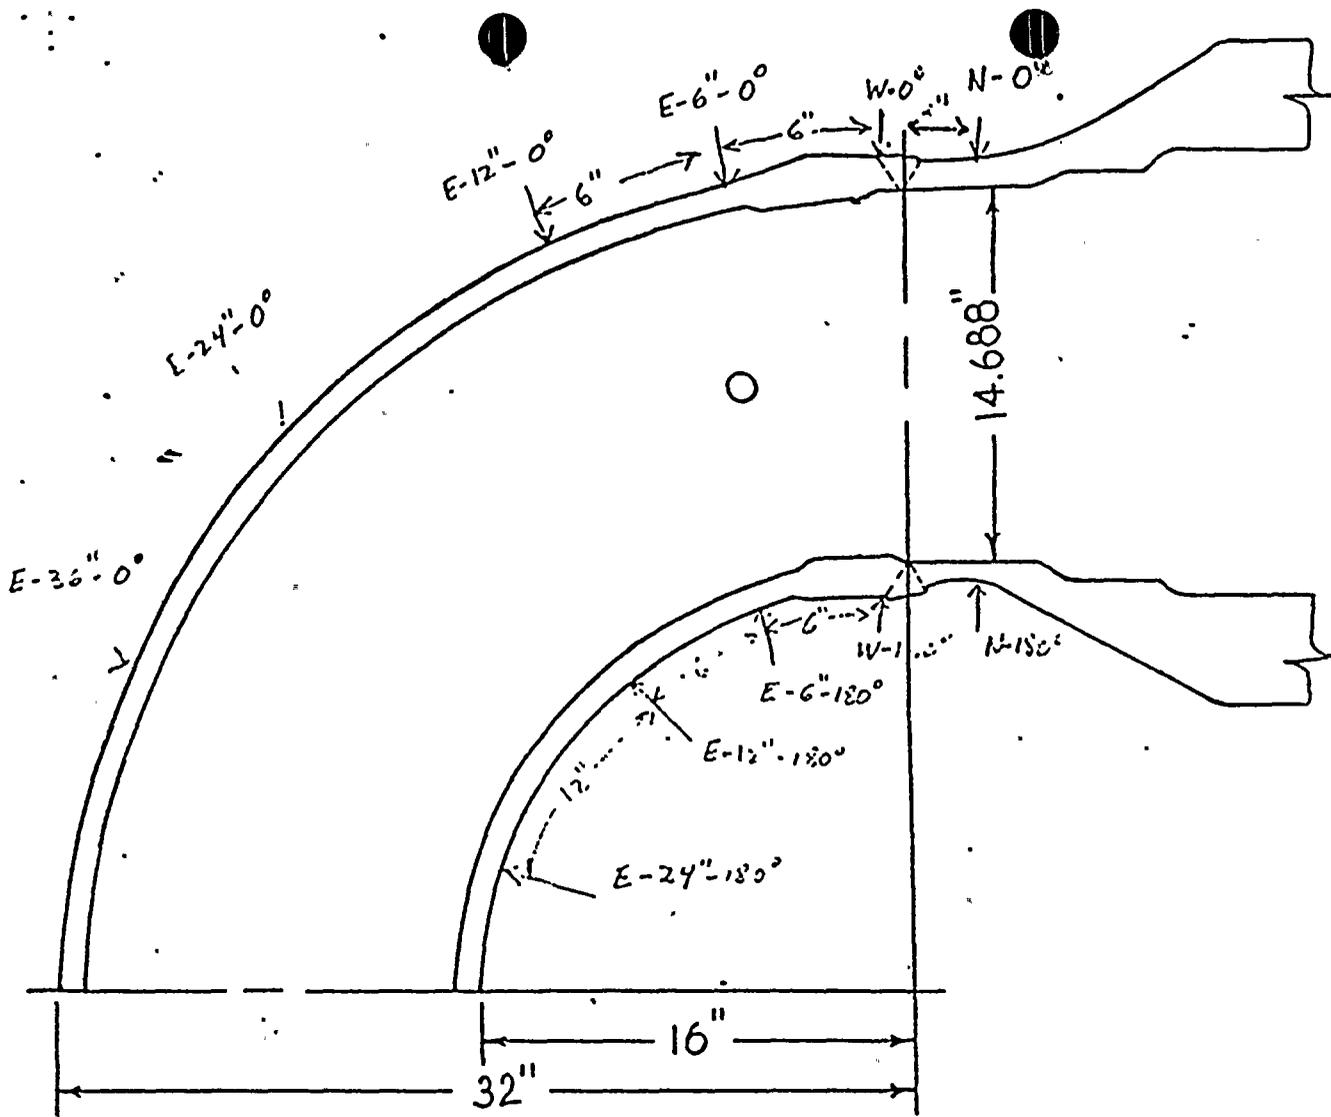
Location of Thermocouple on the Nozzle, Weld and Elbow at 0° and 180° Positions.
